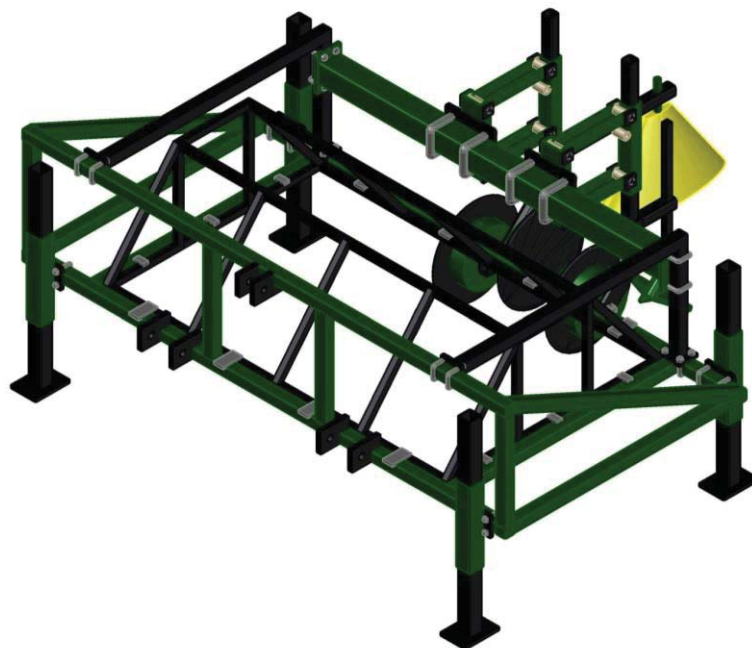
3D model of prototype field unit based on NCEA's engineering drawings.
